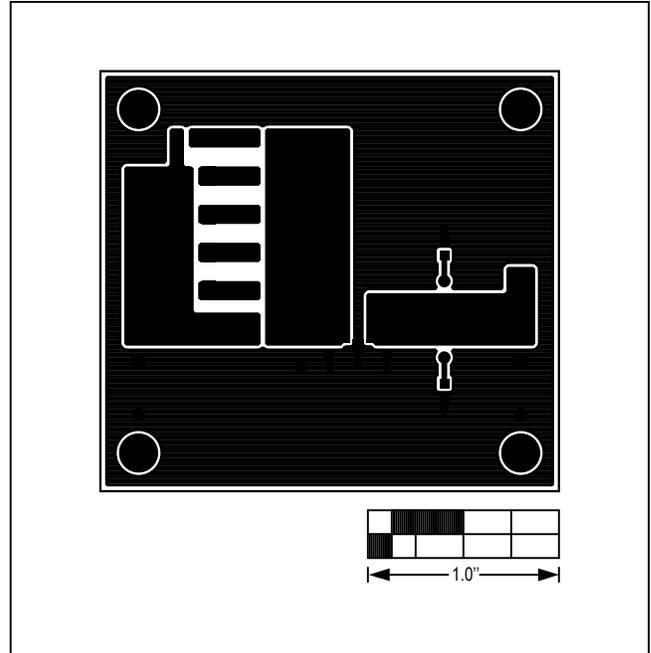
MAX14626 EV Kit PCB Layout—Component Side
